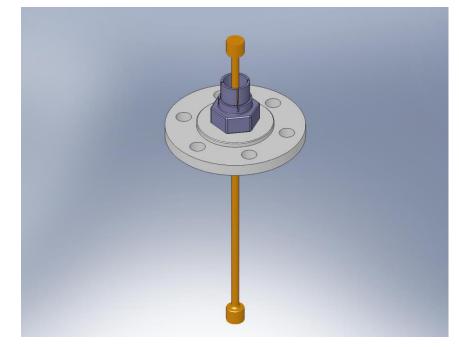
Tighten nut against the Flexure Mount. Make sure that the hex flange on the Flexure Mount seats firmly against the bottom surface of the Flexure Lower Plate.
